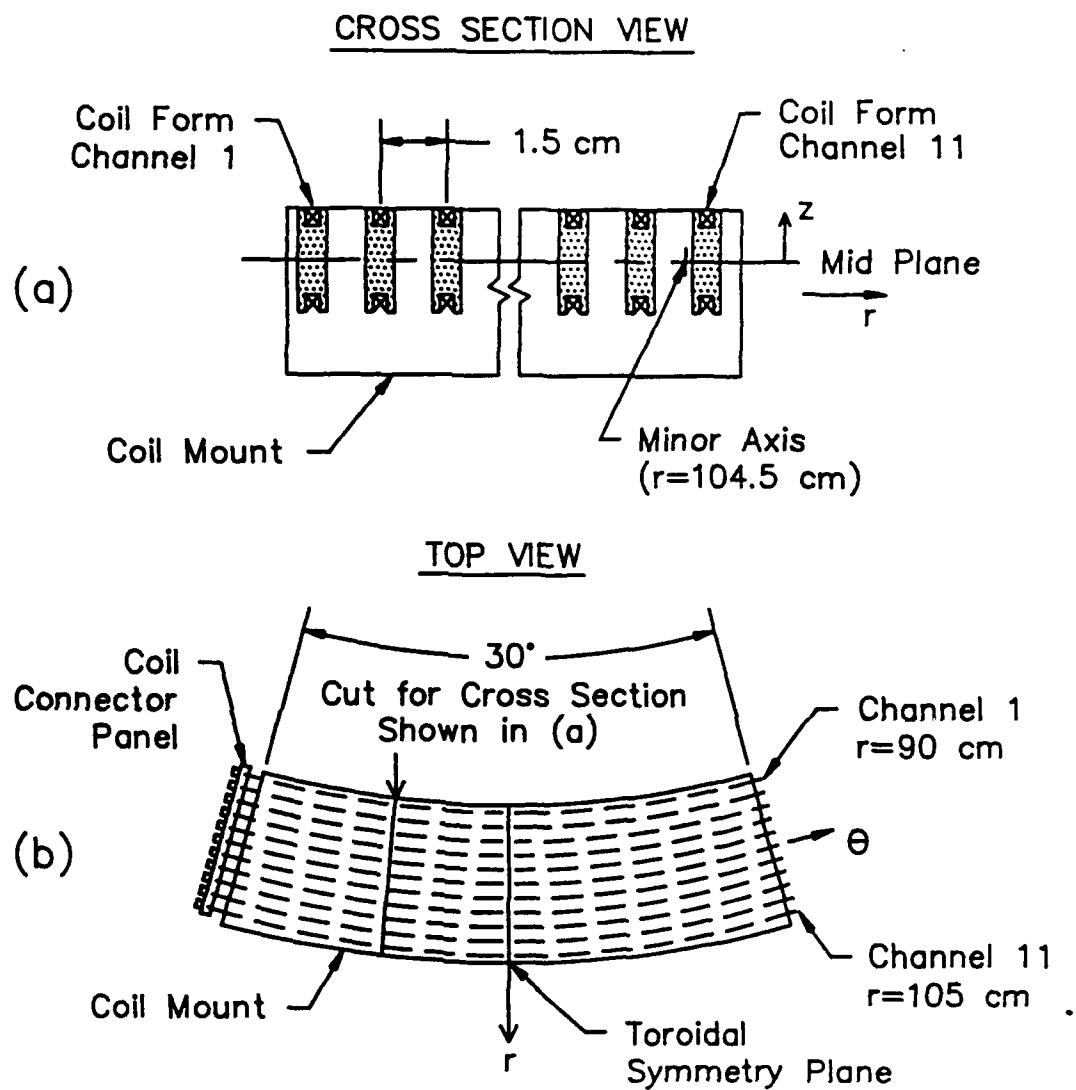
Construction of the probe developed to measure B_r . (a) Cross section view of coil mount which supports 11 wound coil forms and (b) top view of coil mount.
